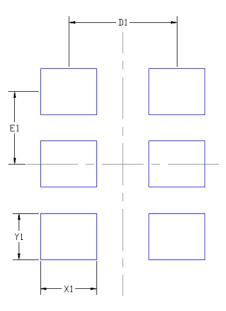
Si545 (2.5×3.2 mm) PCB Land Pattern
